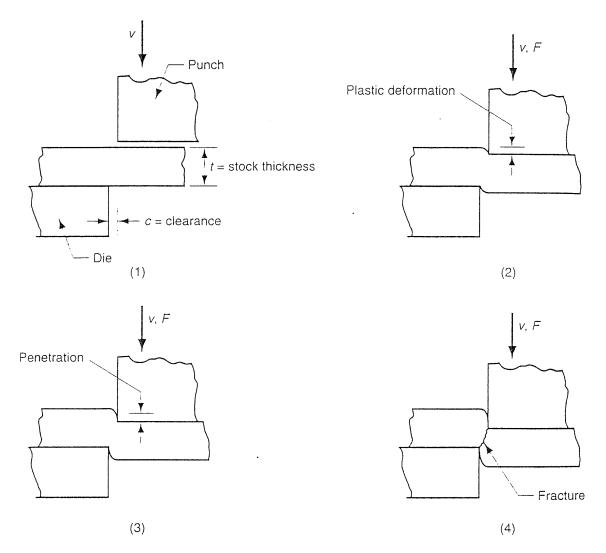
Shearing of sheet metal between two cutting edges: (1) just before the punch contacts work; (2) punch begins to push into work, causing plastic deformation; (3) punch compresses and penetrates into work, causing a smooth cut surface; and (4) fracture is initiated at the opposing cutting edges that separate the sheet. Symbols v and F indicate motion and applied force, respectively.
